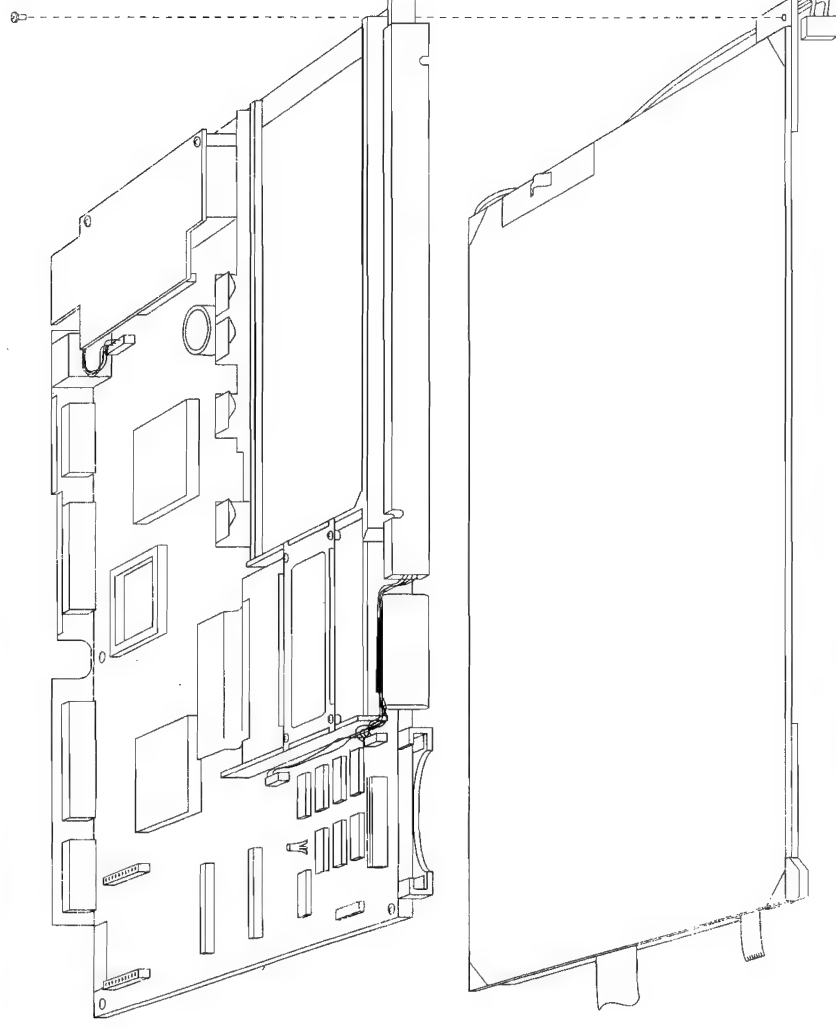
Removing and Replacing the Screen/Digitizer Subassembly
